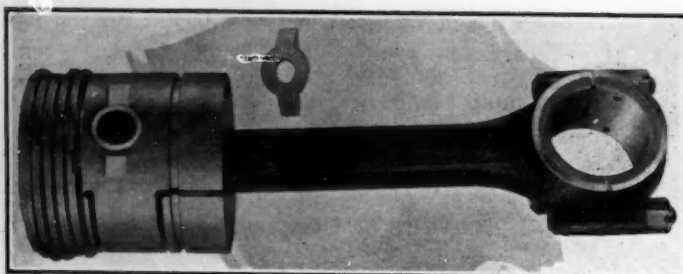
PISTON ASSEMBLY, SHOWING WRIST-PIN RETAINER
